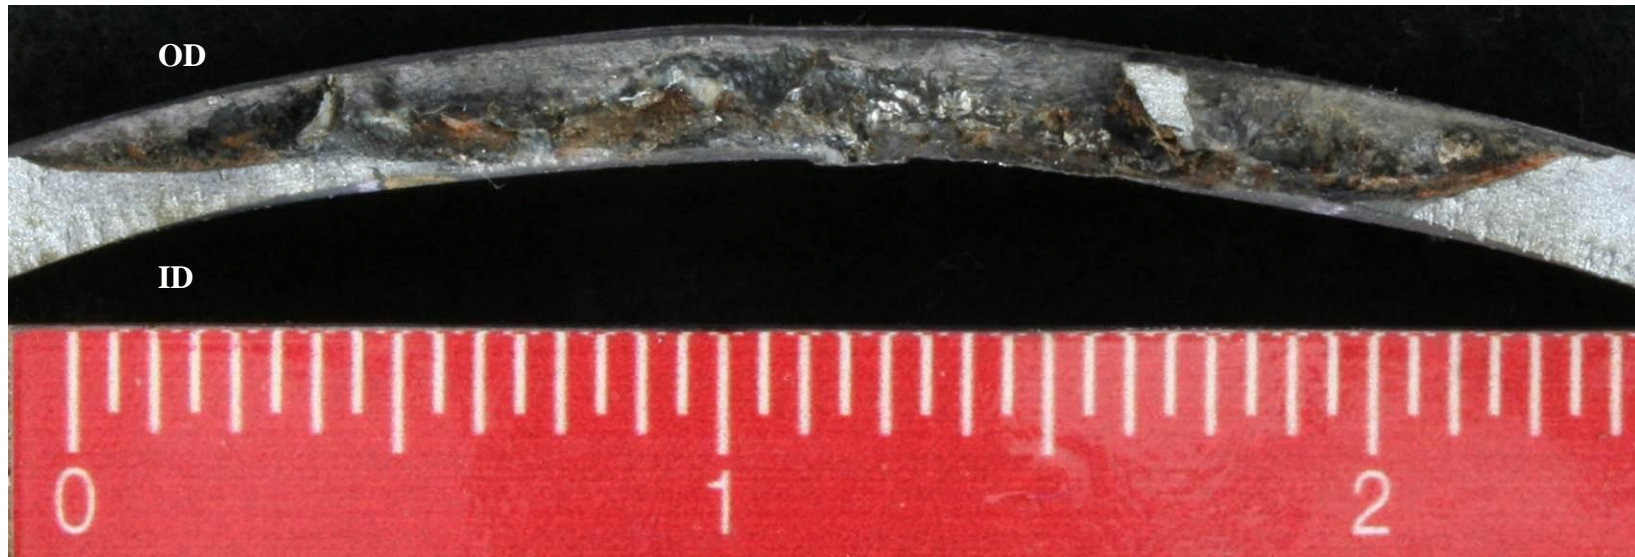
Photograph of the fracture surface removed from Crack Colony 4.
